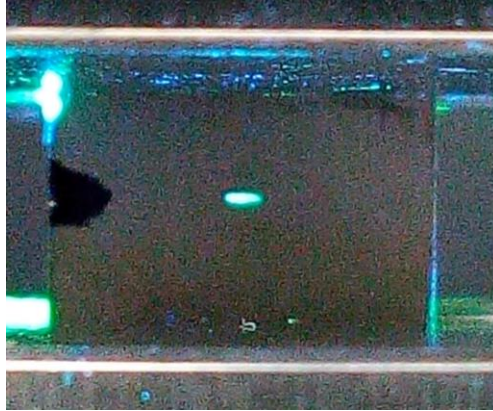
Dye Penetrant Inspection of Specimen 6 Back Surface at Breakthrough of Surface Crack
